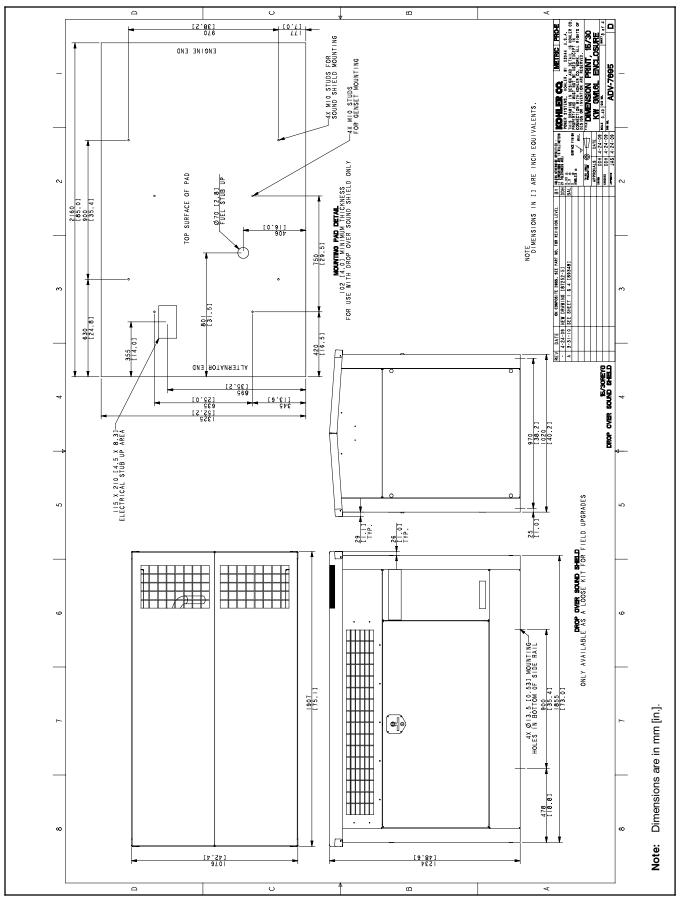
Dimension Drawing ADV-7695, Sheet 3, Dropover Sound Enclosure
